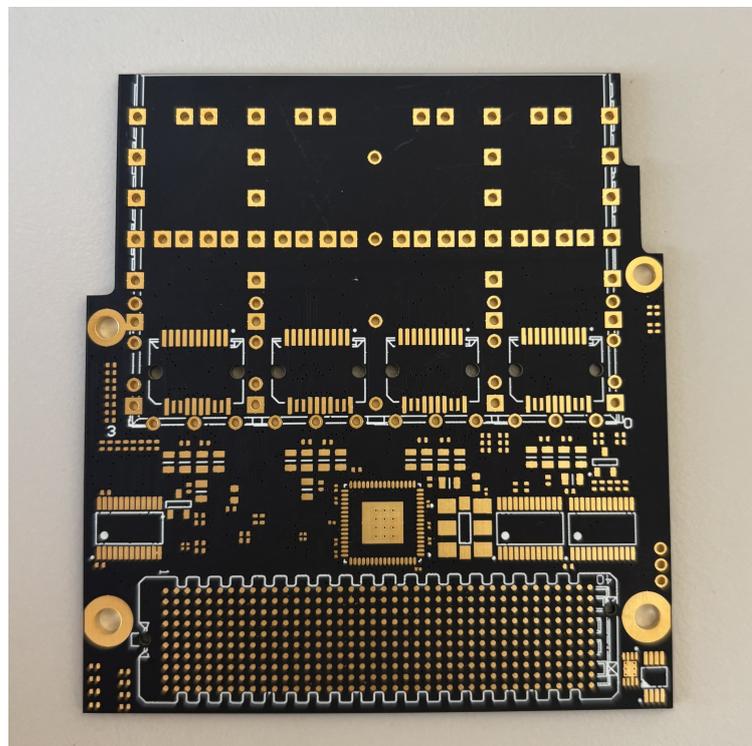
8 channel SFP+ FMC PCB (reverse side)
